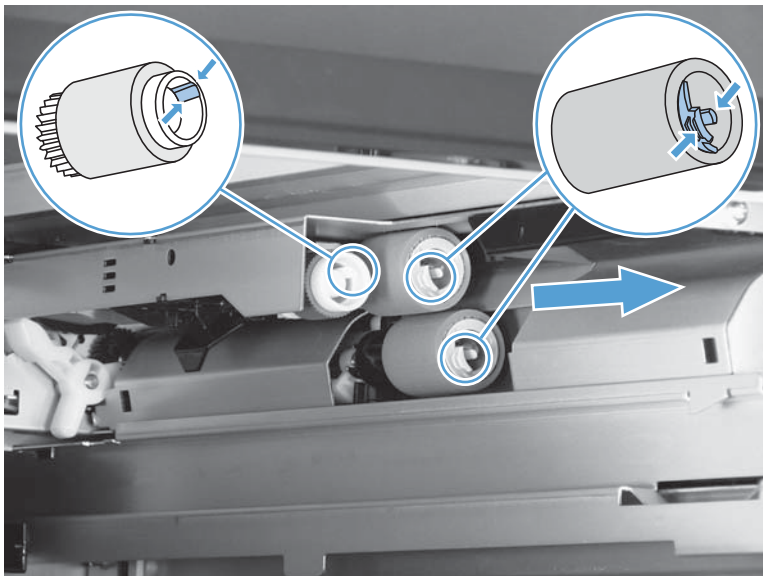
Remove the 1x500 or 3x500 rollers (1 of 2)
